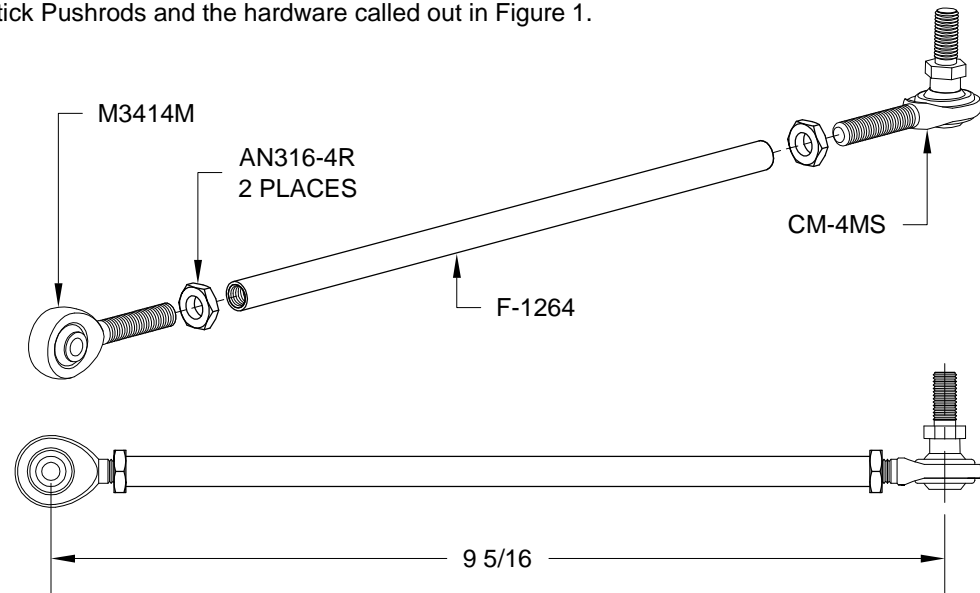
CONTROL STICK PUSHROD ASSEMBLY
